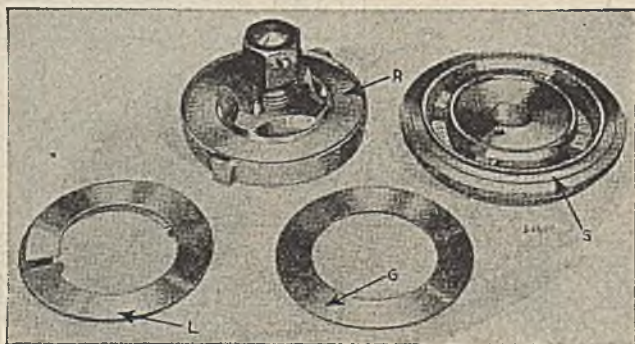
Type K discharge valve showing crab and valve cover complete.
